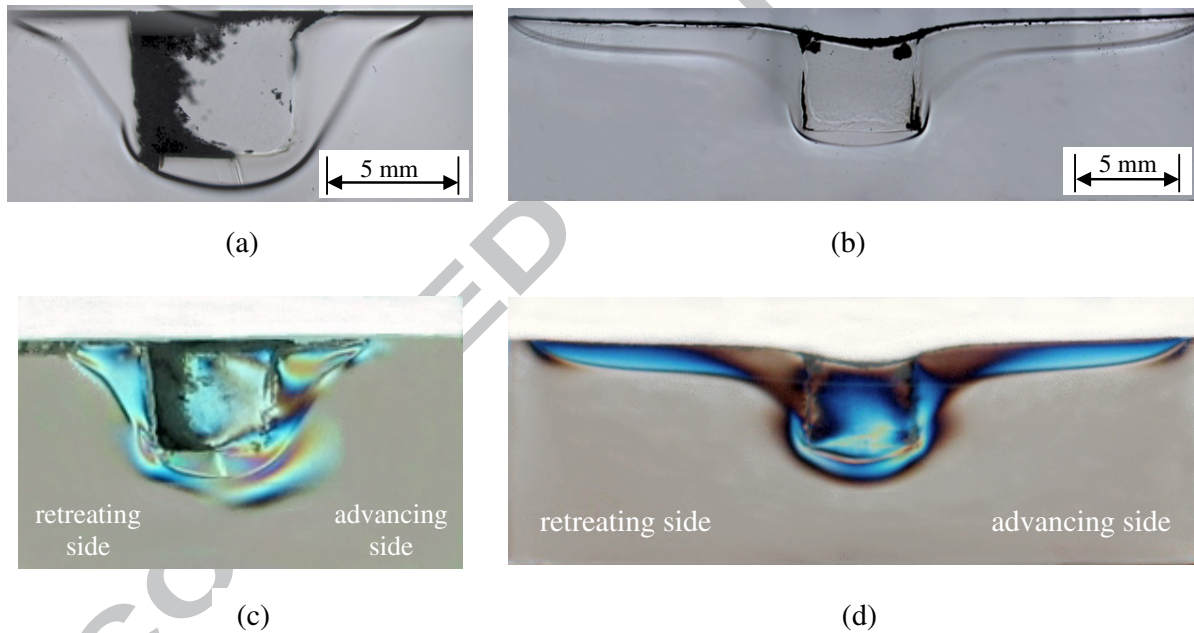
Backlight and polarized light images of tool 1 (a and c) and tool 2 (b and c) welds.
